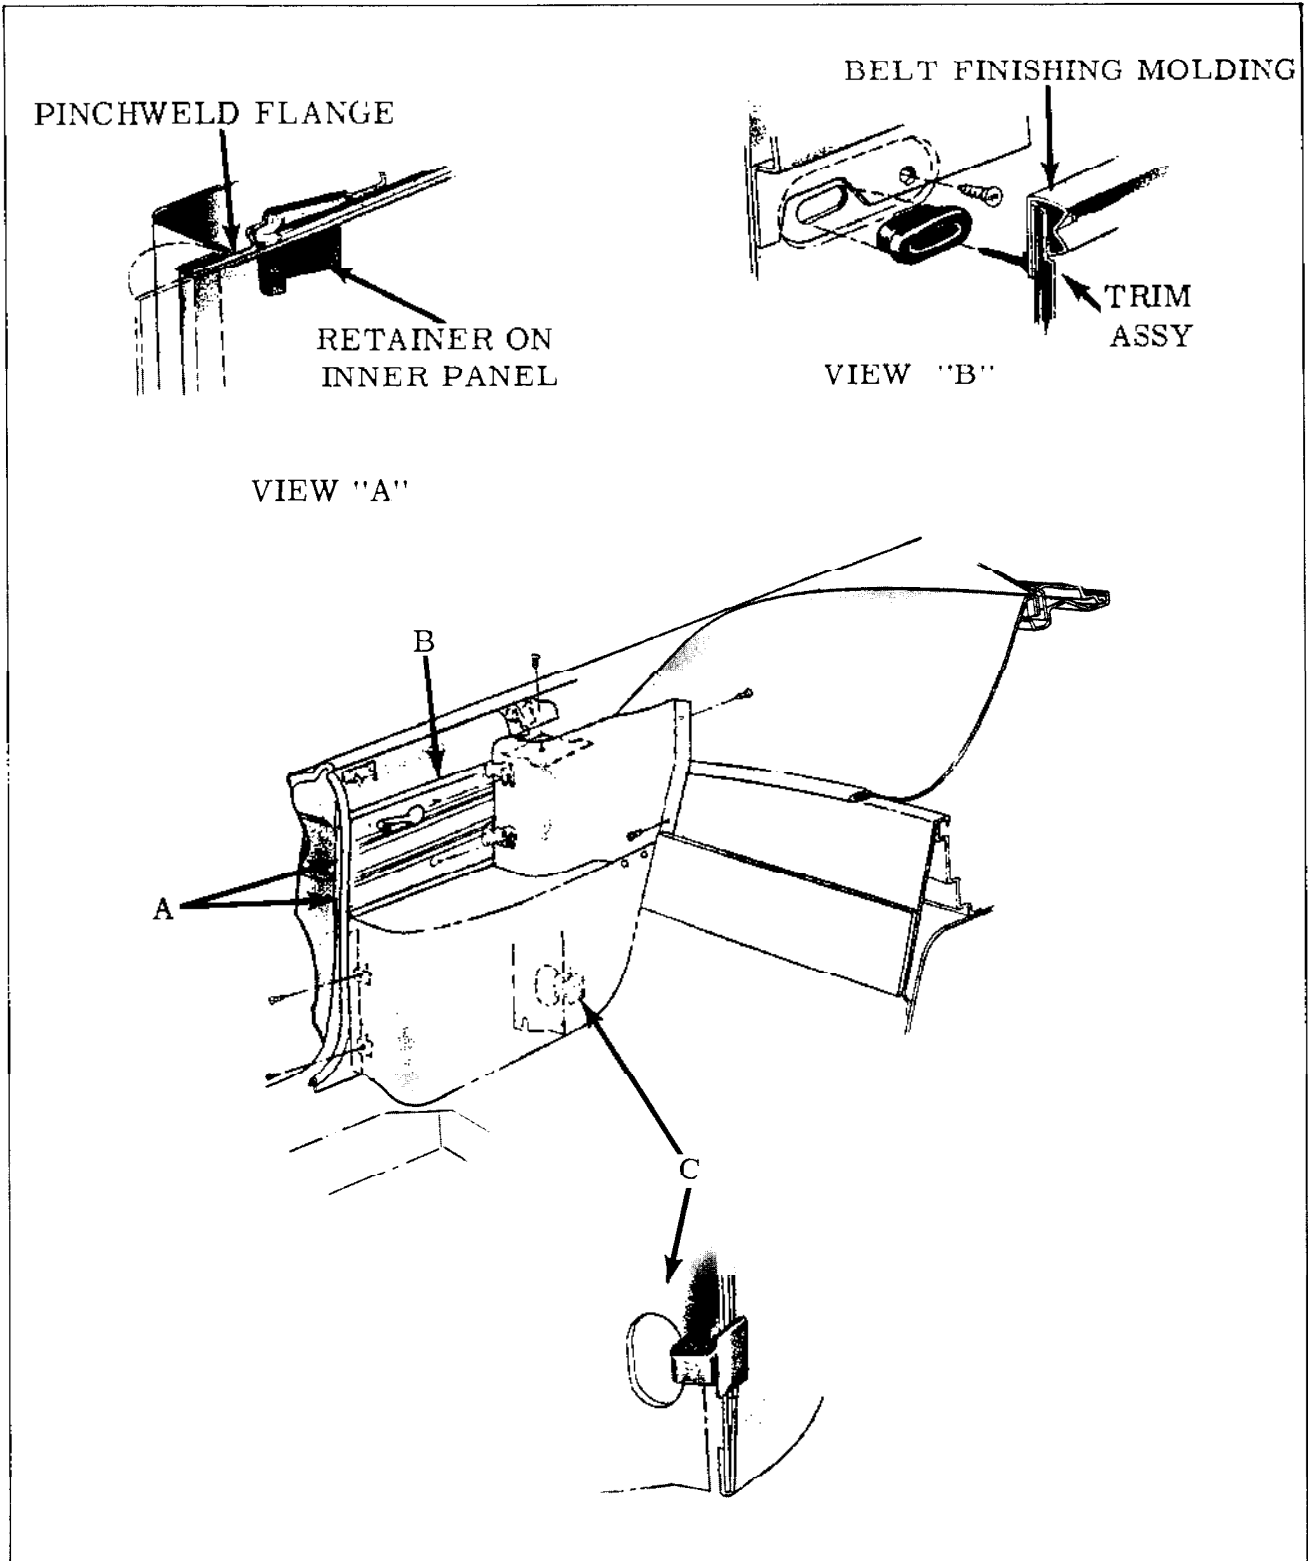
Rear Quarter Trim Assembly ("67" Style)
